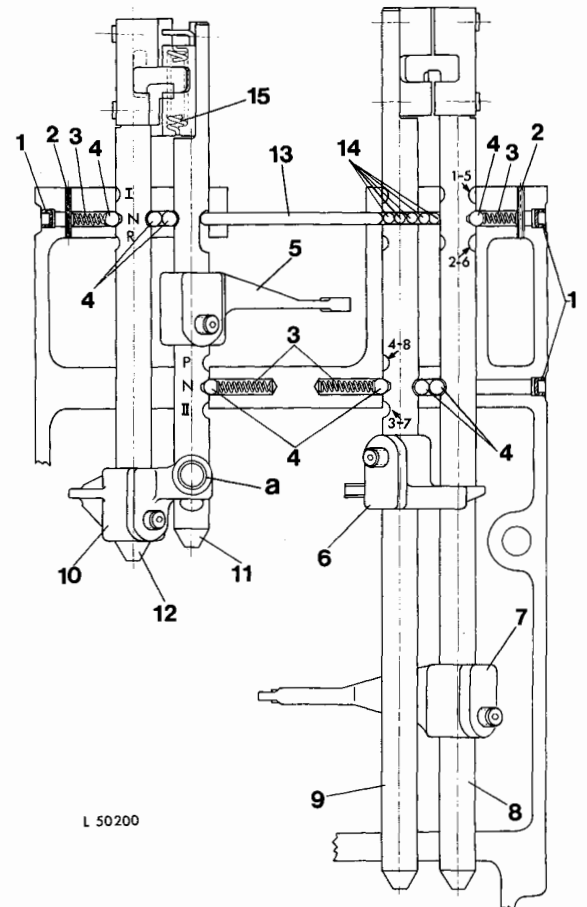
Shifting Mechanism for 8-Speed Transmission with Parking Lock
